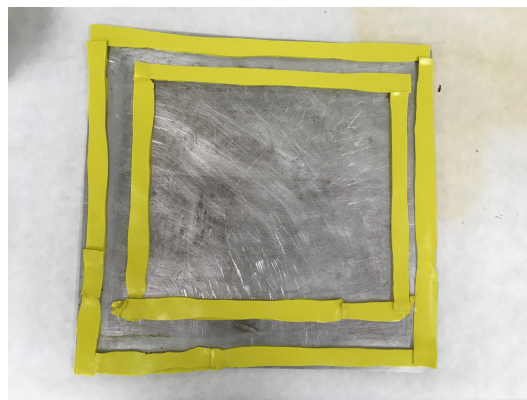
Prepared aluminum plate with tacky tape for sheet casting.
